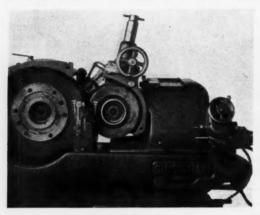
Automatic Sizing Device Mounted on Cincinnati No. 2 Centerless Grinder.
